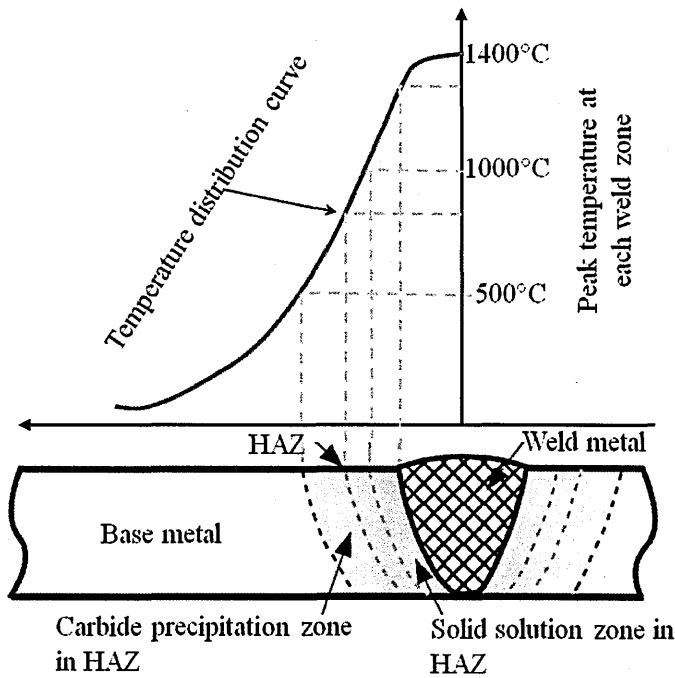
Schematic diagram showing metallurgical zones in Type 316 stainless steel weldment [53].
